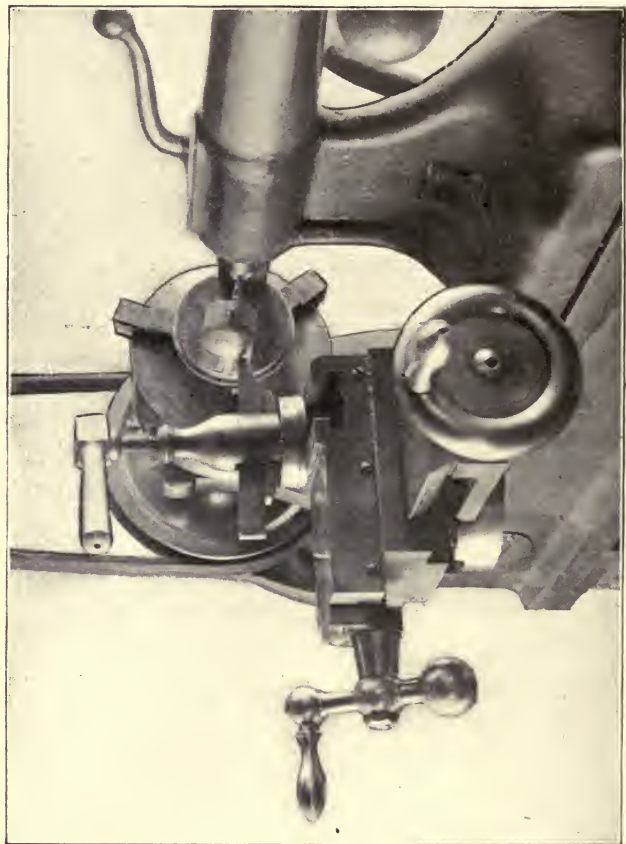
TURNING PISTON CASTING TO FIT STEEL TUBE.
